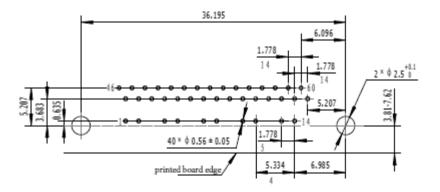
Outline dimensions of the socket on the bent printed board (without tolerance ±0.1)
